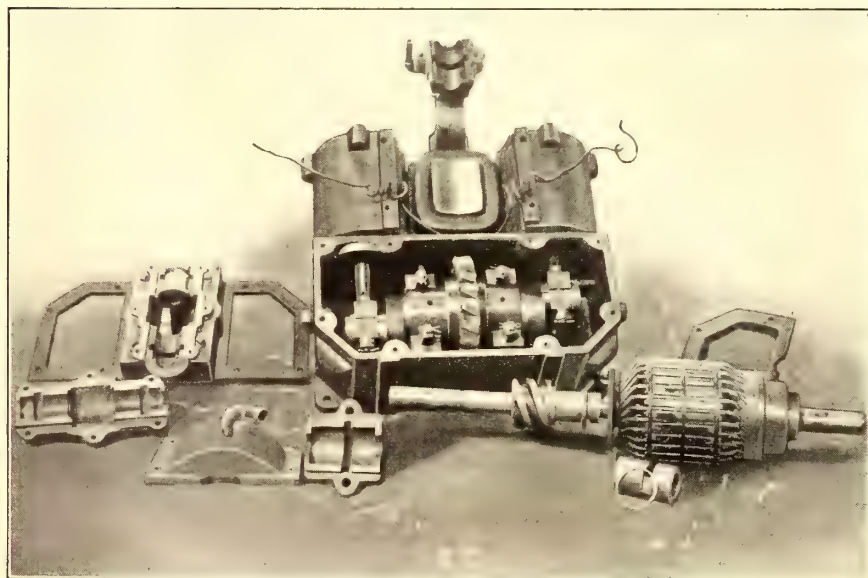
TOP FIELD AND ARMATURE OF MOTOR REMOVED
